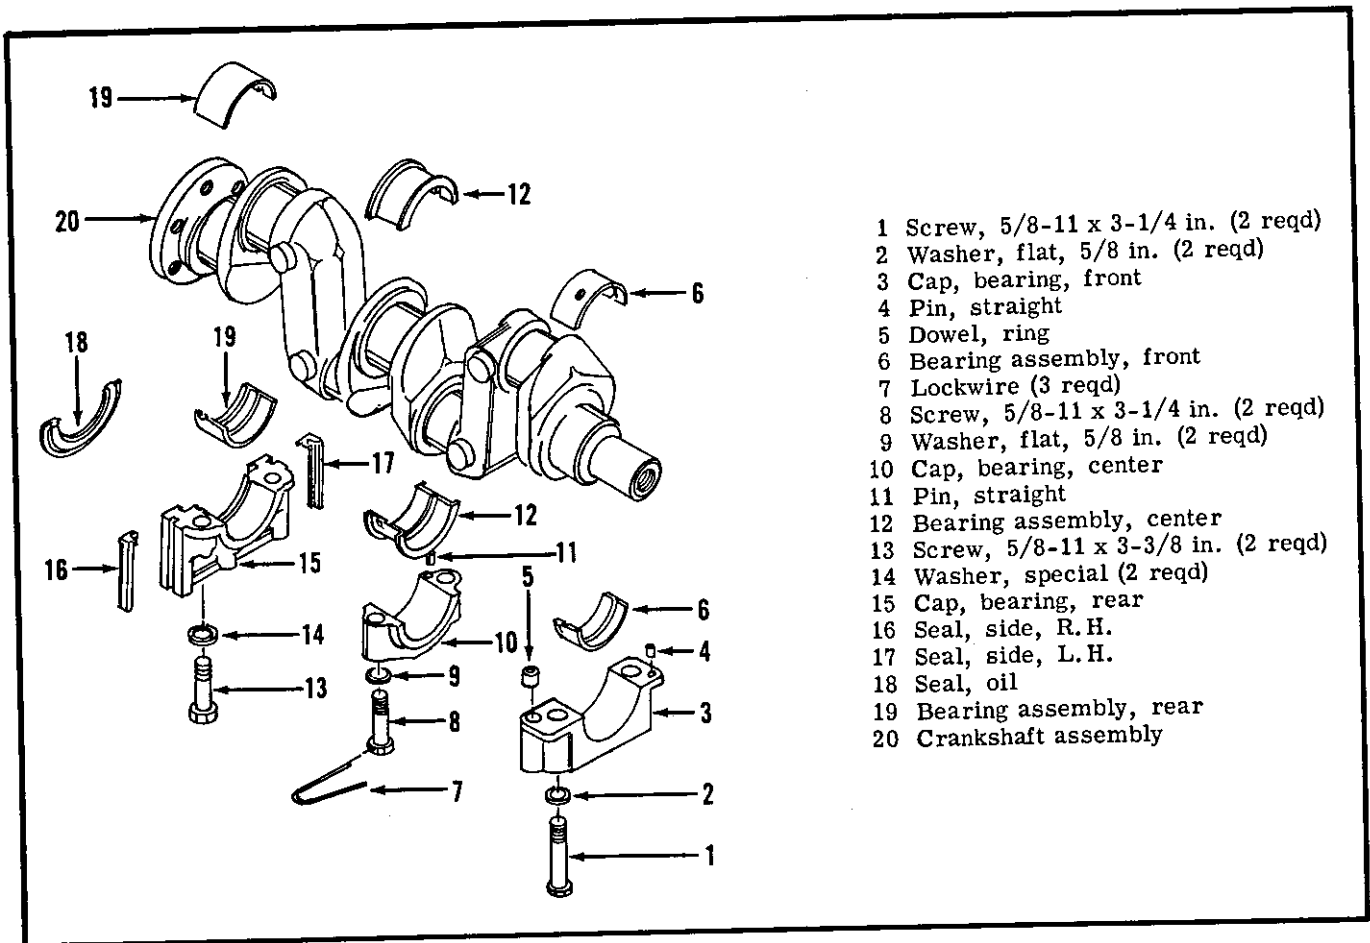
Engine Main Bearings and Crankshaft, Disassembly and Reassembly
